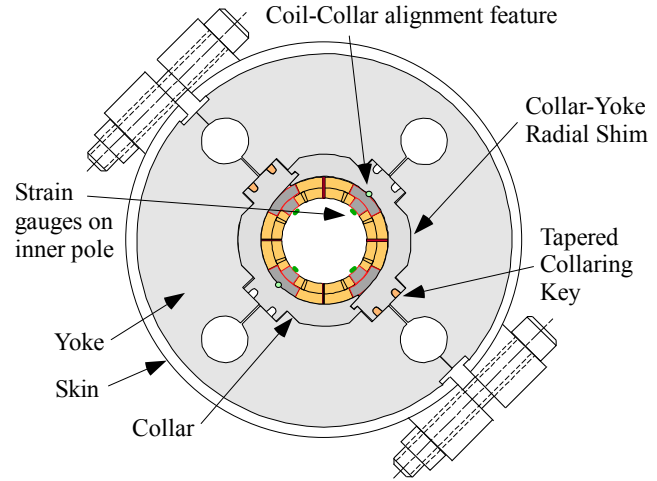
TQC assembly with dipole-style collars as in TQC02Eb.
